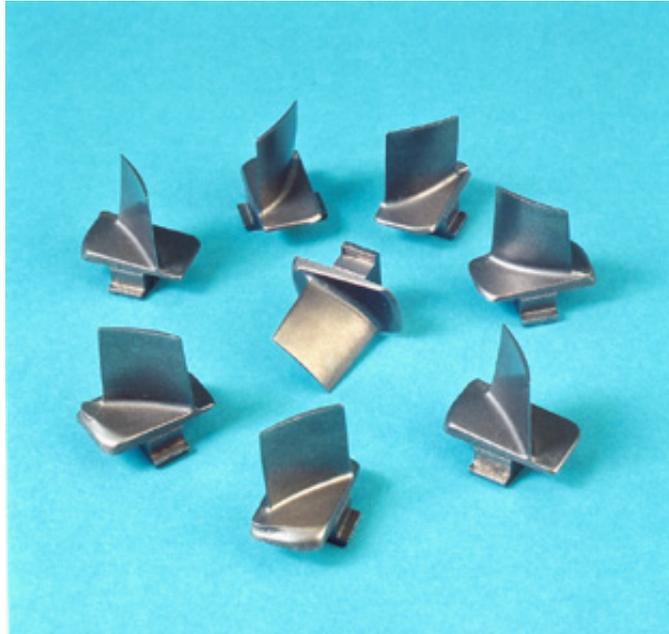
High pressure compressor blades of gamma TiAl manufactured by hot extrusion followed by closed-die forging and electro-chemical milling by GKSS (53). Courtesy of GKSS.
